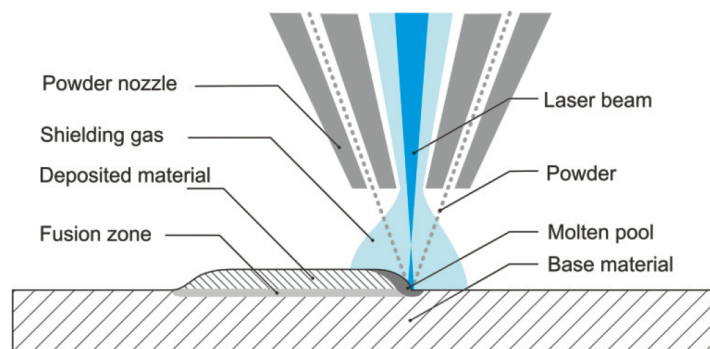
Schematic overview of the LMD process, showing the nozzle, substrate and the deposited material. The laser beam, powder flow and shield and shielding gas are focused at the melt pool. [19]
